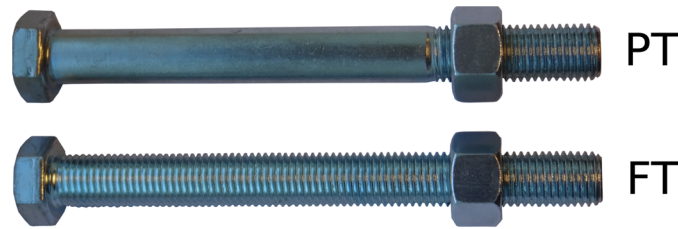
Photo of the two types of bolt and nut assemblies employed in the tests, one with a partially threaded (PT) bolt and the other with a fully threaded (FT) bolt. The grip length $L_g = 118$ mm for both these assemblies.
